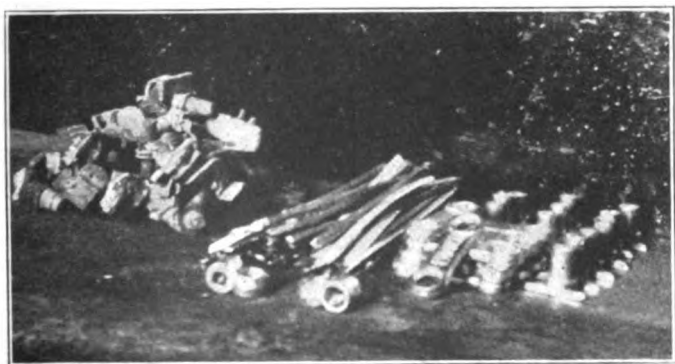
Old Lead Parts Turned Into New If Mold Is at Hand.
